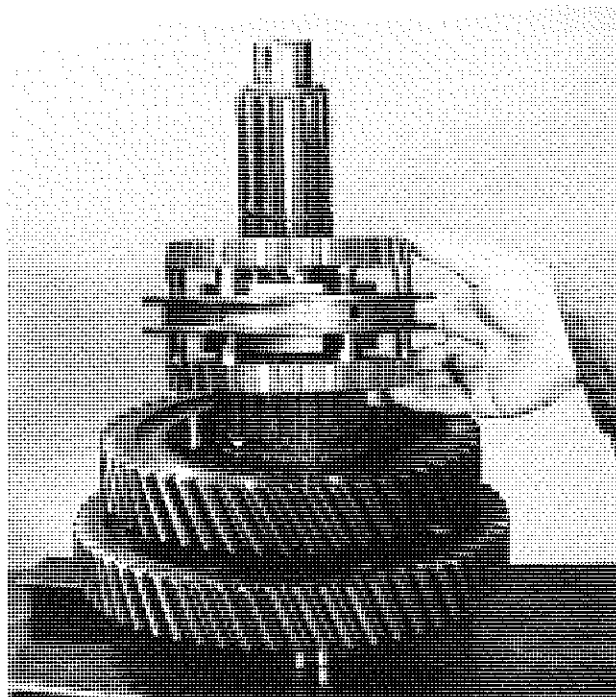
Removing 2nd-3rd Speed Synchronizer
